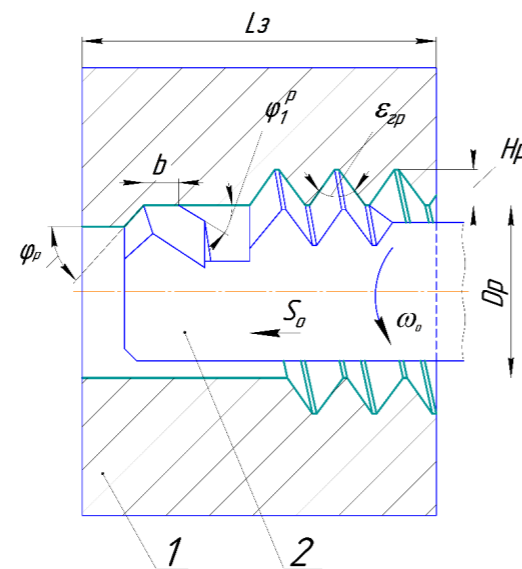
Diagram of internal threading with a combined tool with a comb cutter
